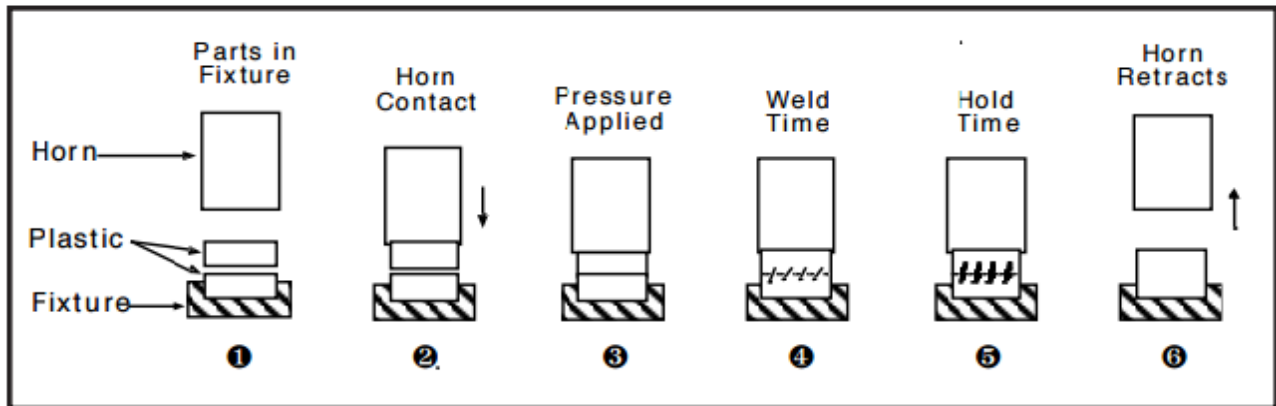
Ultrasonic welding, (1)Parts in Fixture, (2) Horn Contact, (3) Pressure Applied ,(4) Weld Time, (5) Hold Time ,(6) Horn Retracts <sup>[22]</sup>
